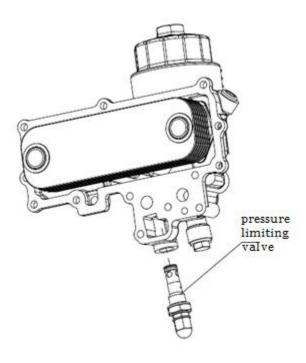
Exploded View of Main Oil Gallery Pressure Limiting Valve
